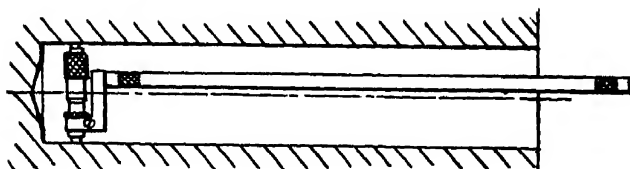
JOHANSSON INSIDE MICROMETER WITH HANDLE ATTACHMENT FOR DEEP HOLES
